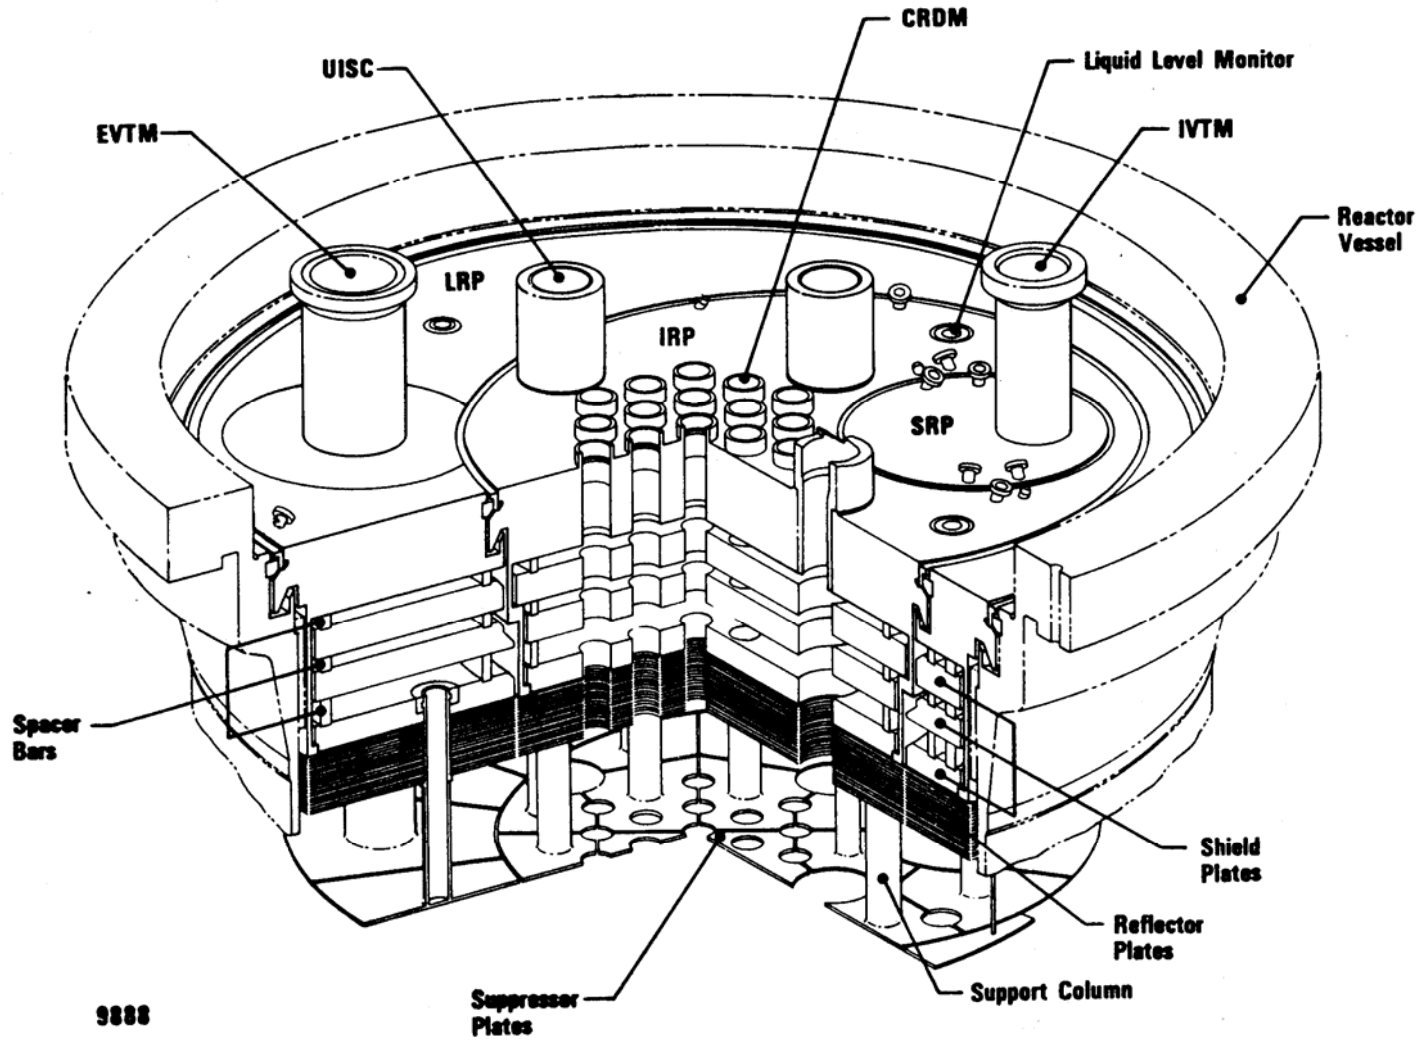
CRBRP reactor vessel head rotating plugs.
